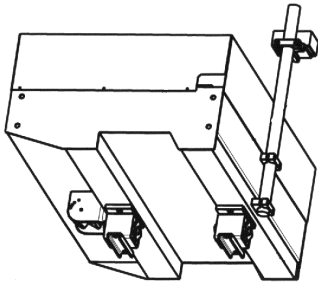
Front module with cover and with camera, Rosta bearings and antenna stand mounted.
